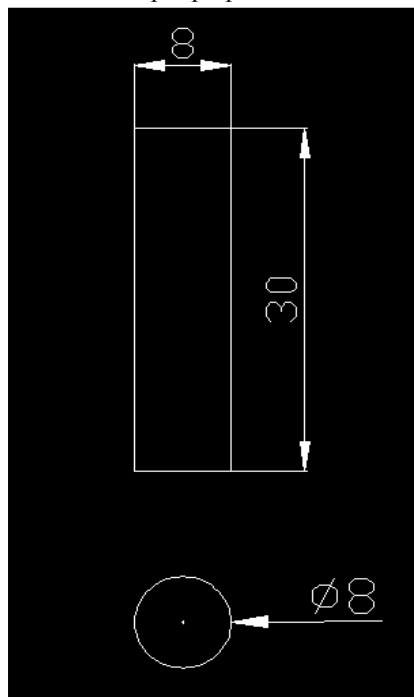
Sketch of Pin (specimen) used for Pin-on-Disc wear test
